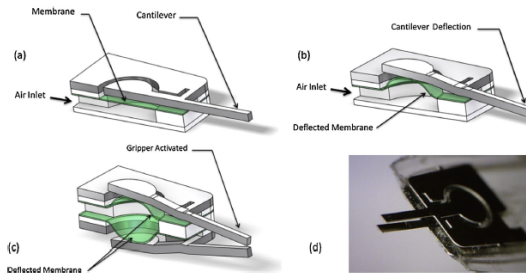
A PBA micro-gripper, with (a) and (b) showing a one-arm bearing onto a fixed plate, or with two arm-bearings (c) [9].
